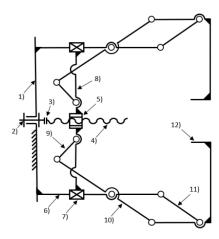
Kinematic diagram of the clamp's executive part. Planetary gear outer wheel (base) 1), Carrier: 2), Clutch: 3), Lead screw 4), Nut 5), Linear guide 6), Linear bearing 7), Trolley (nut and line bearing connector) 8), Additional spherical plain bar 9), Components of the spherical plain side 10) and 11), Effector, actuating element 12).
